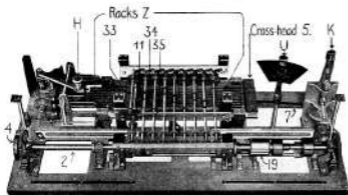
BASE-PLATE AND MECHANISM; TRAVELING CARRIAGE AND FRONT SHAFT REMOVED
